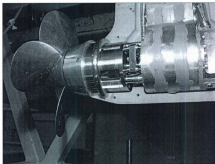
A clear view of the clearance between the inner pod unit and shell interior.
